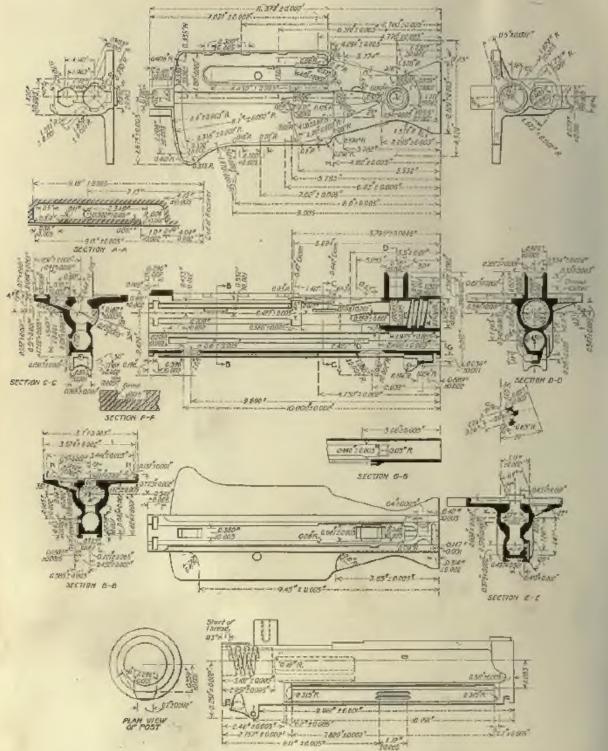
RECEIVER DETAILS WITH LIMITS AND TOLERANCES
